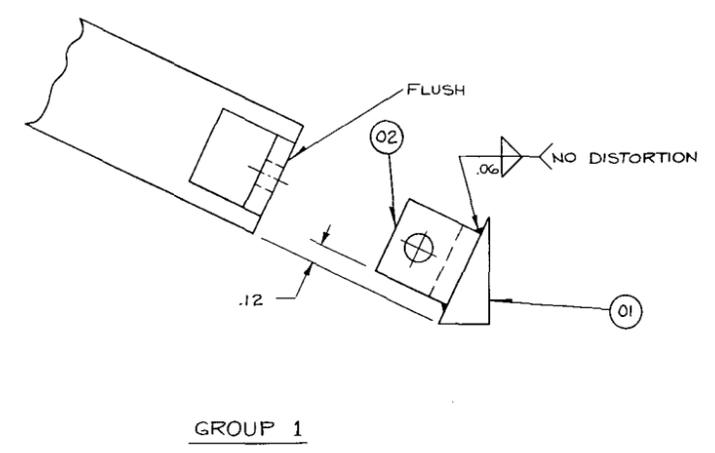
Thimble Detail and Assembly (FLECHT-SEASET Unblocked Bundle)
